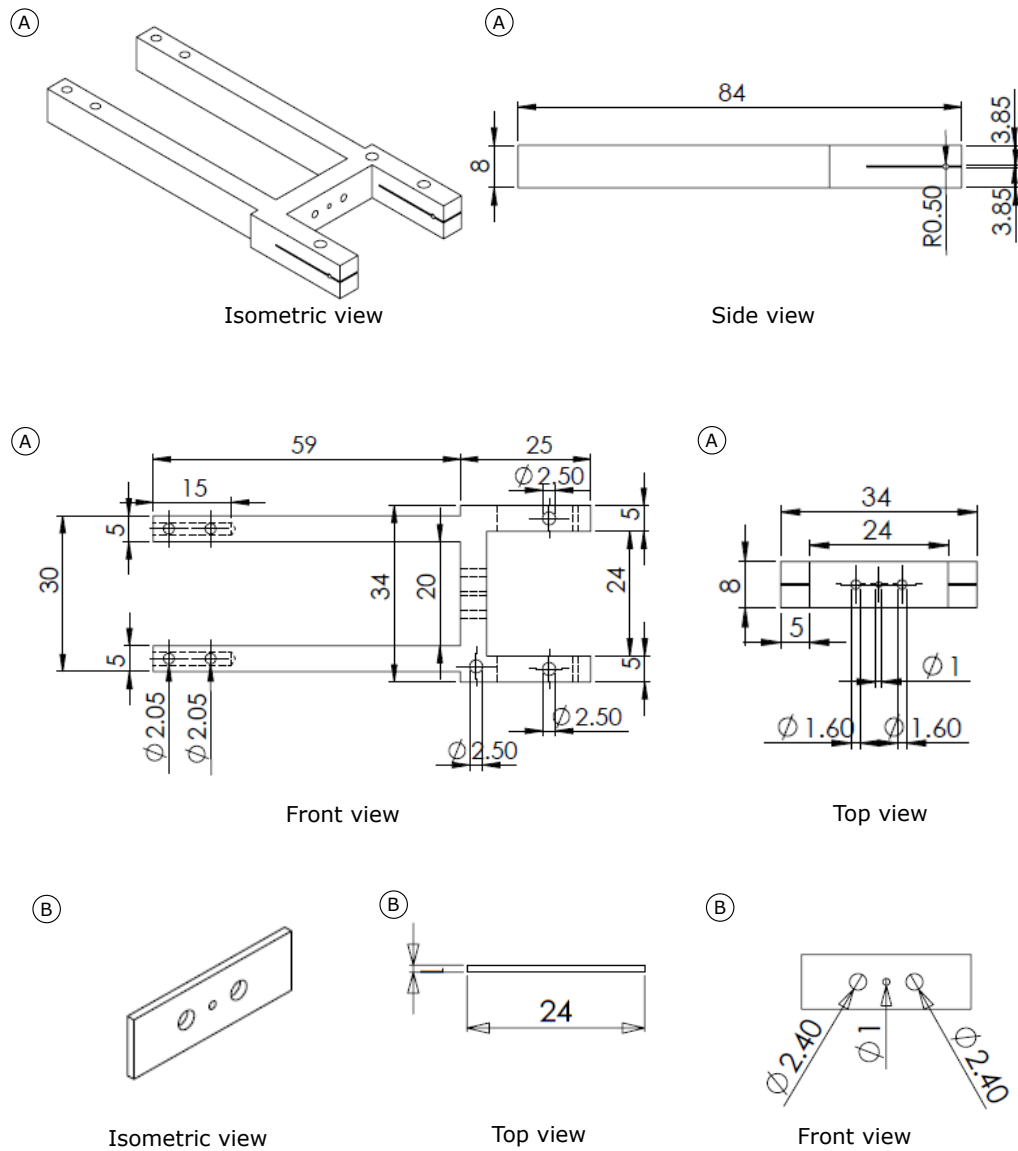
Dimensional details the parts A and B of the ion trap. All the dimensions of length are in units of millimeter and the angular dimensions are in units of degree.
